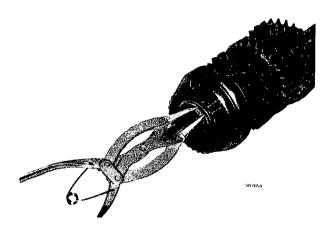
B-50 - Removing 3rd and 4th Synchronizer snap ring
